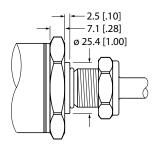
Design with raised face (R10) – Housing nut with thread, dimensions in mm [in]
